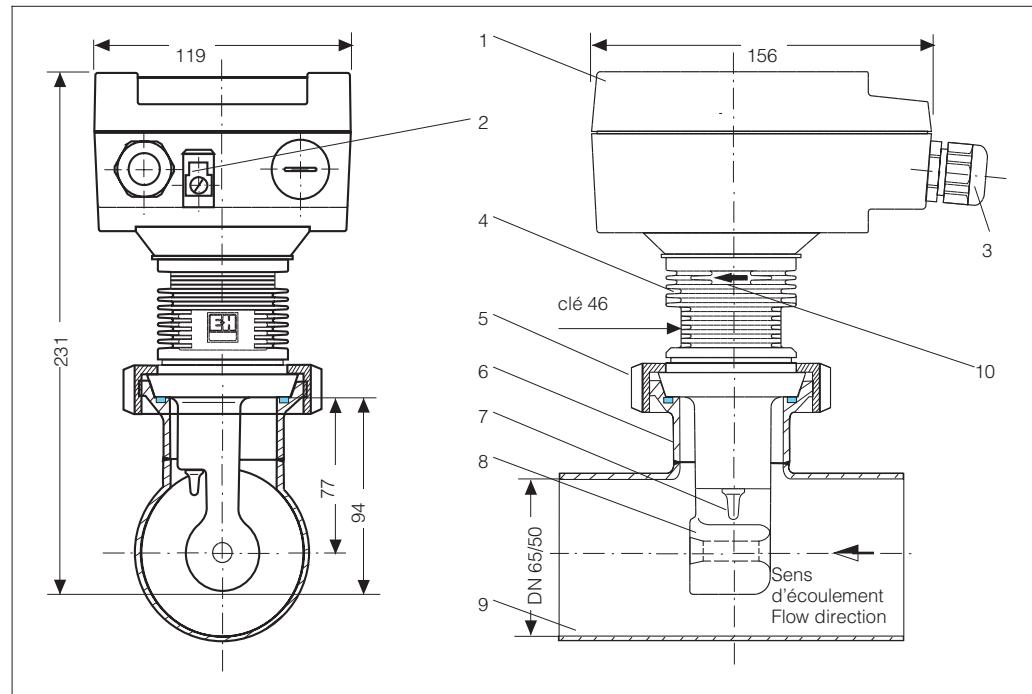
Dimensioned drawing of measuring cell CLS 51
